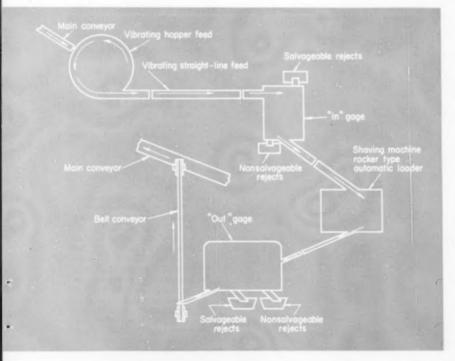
(left) Schematic drawing of feed arrangement of the automatic in and our gear gaging setup.
